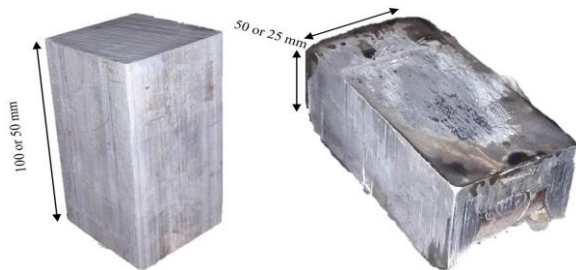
(a) Initial sample before the CCDF process, (b) sample after performing one pass of the CCDF process.
